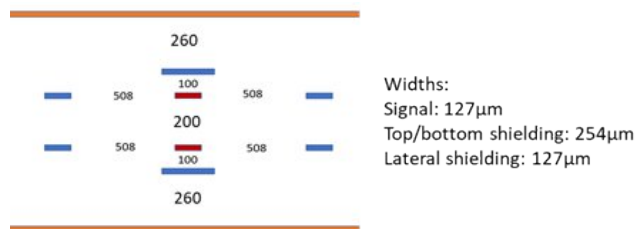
Front view of the PCB's 1st and 2nd towers with lateral shieldings. Insulator thicknesses and signal and shielding widths are reminded.
